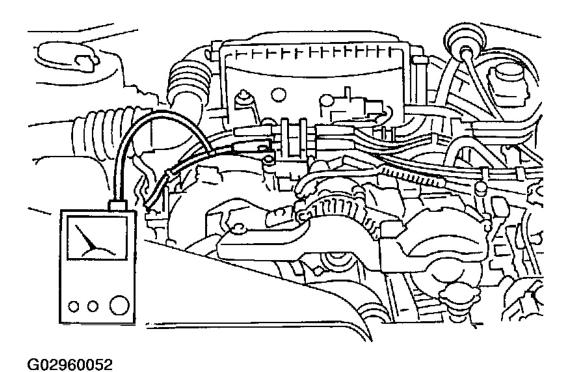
Inspecting Engine Idle Speed Courtesy of SUBARU OF AMERICA, INC.
